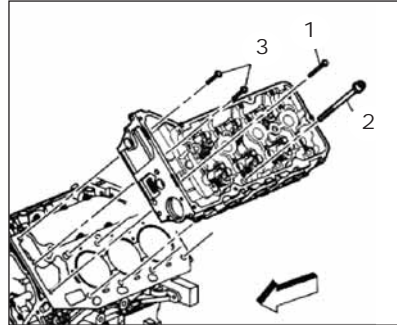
Cylinder head M6 (numbers 1 and 2) bolt locations on GM 3.5L
